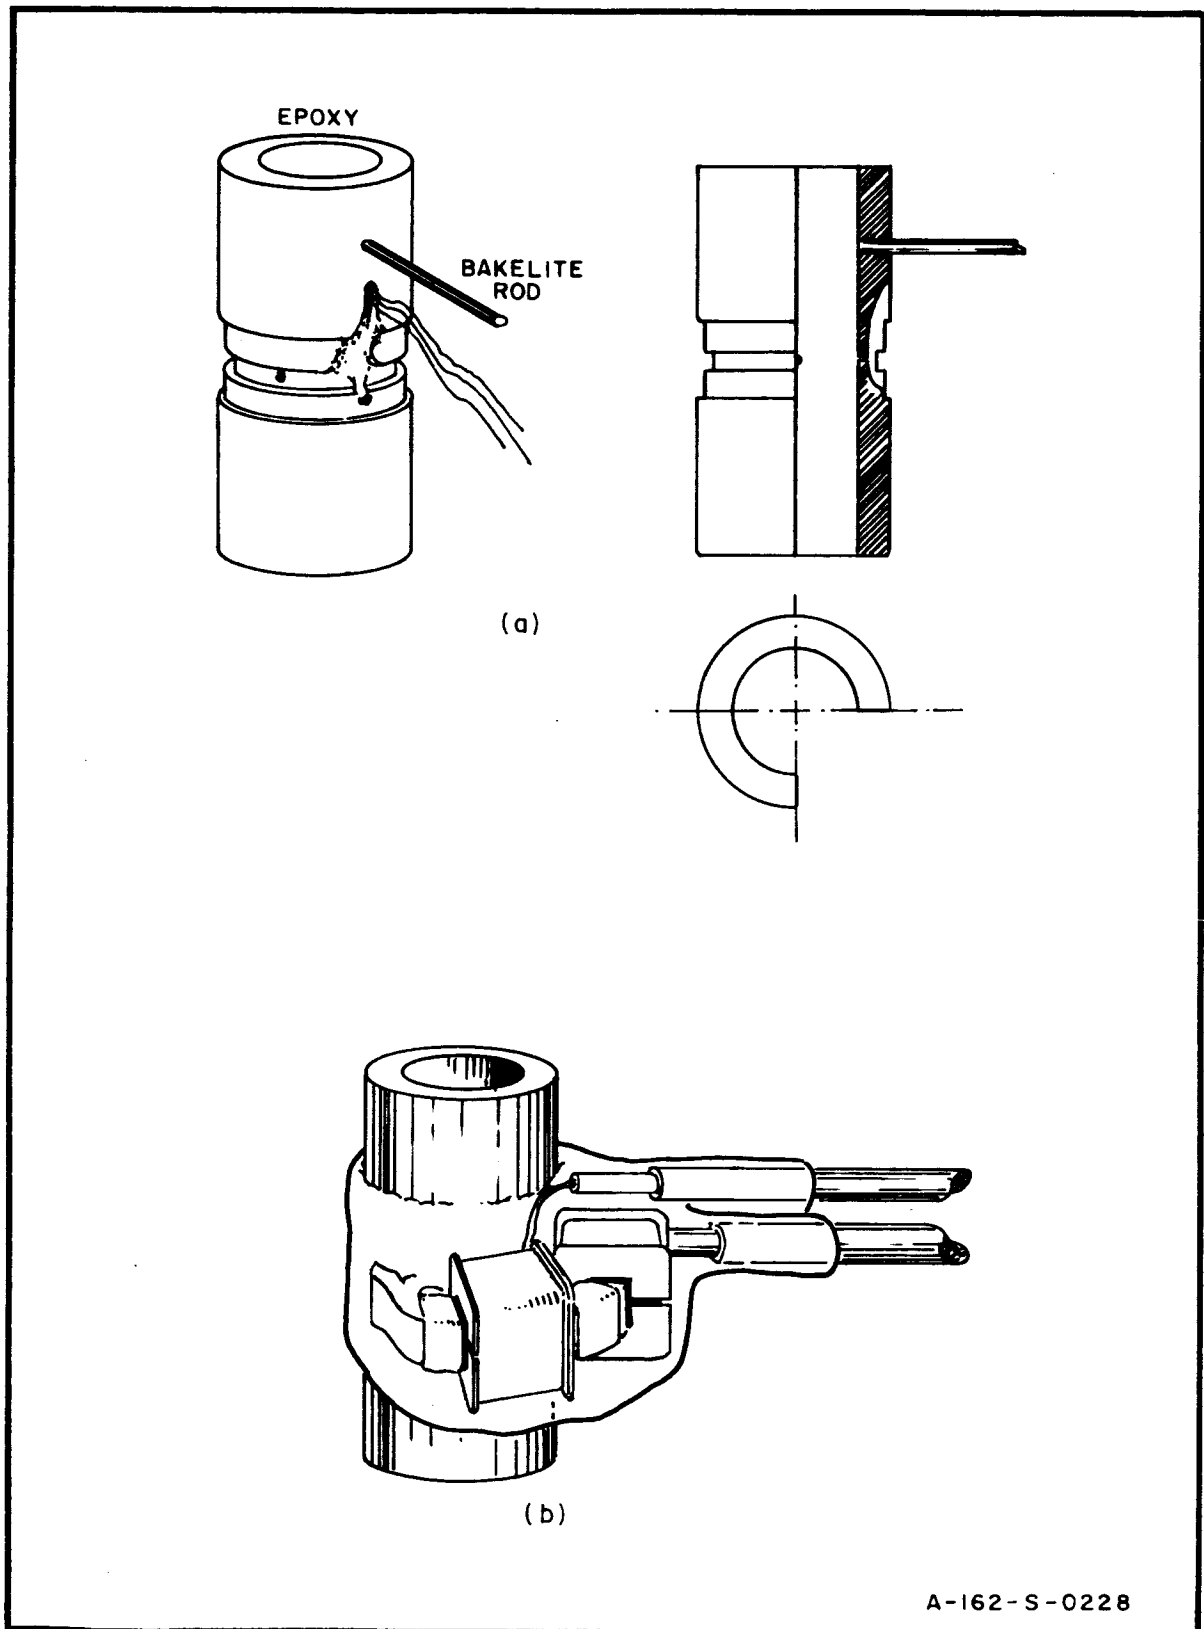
FINAL PROBE ASSEMBLY DETAILS
